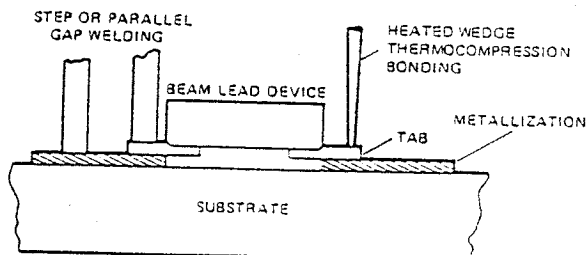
The bonding of the beam lead device is achieved using either a heated wedge (thermocompression bonding) or parallel gap (welding) technique.
